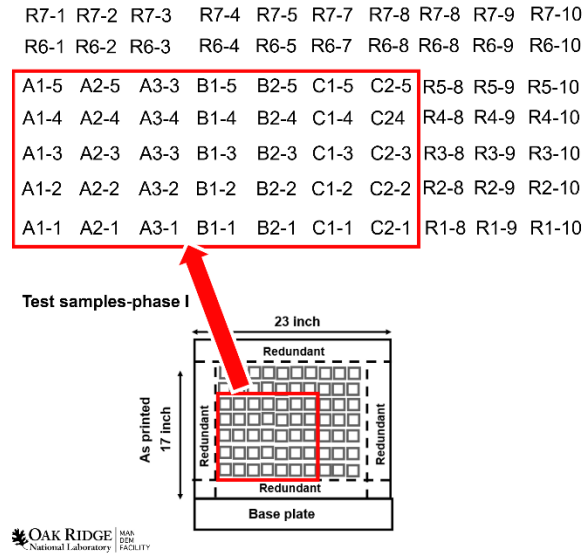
WAAM printed 410 SS wall sample arrangement plan.
